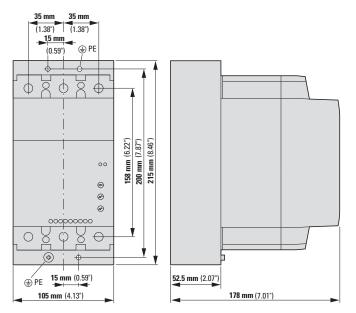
Dimension drawing DS7 without SWD – Size 4 (135 – 200 A)
